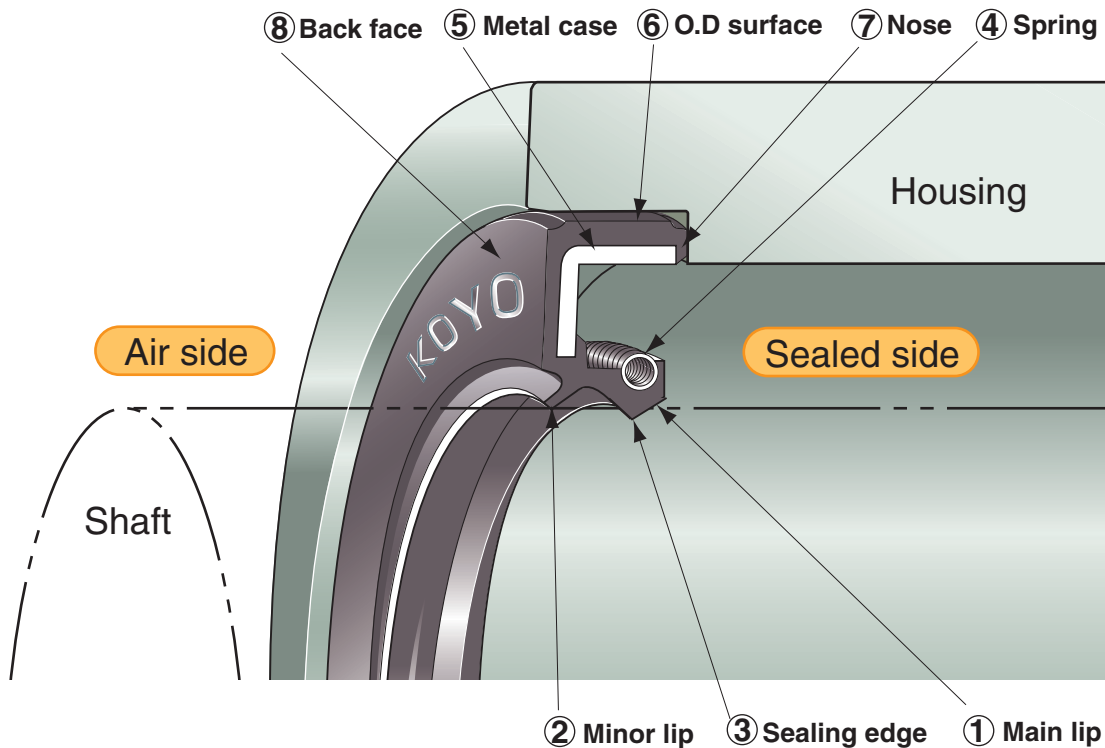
Typically shaped oil seal and component nomenclature
